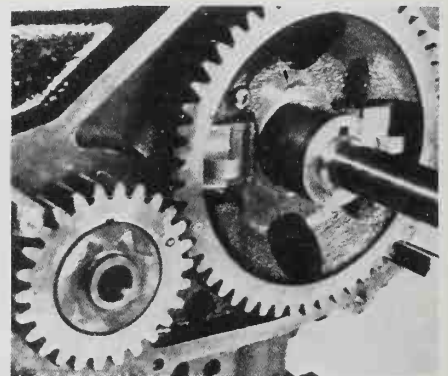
When installing camshaft or crankshaft gear, align "O" timing marks as shown.
